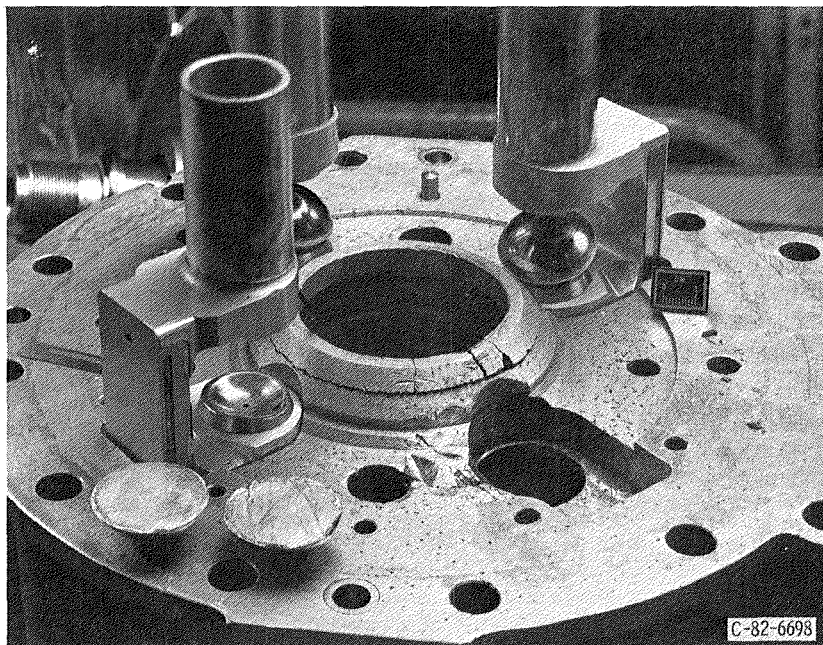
Damaged front crankcase, crossheads, and sliders from drive system failure.
